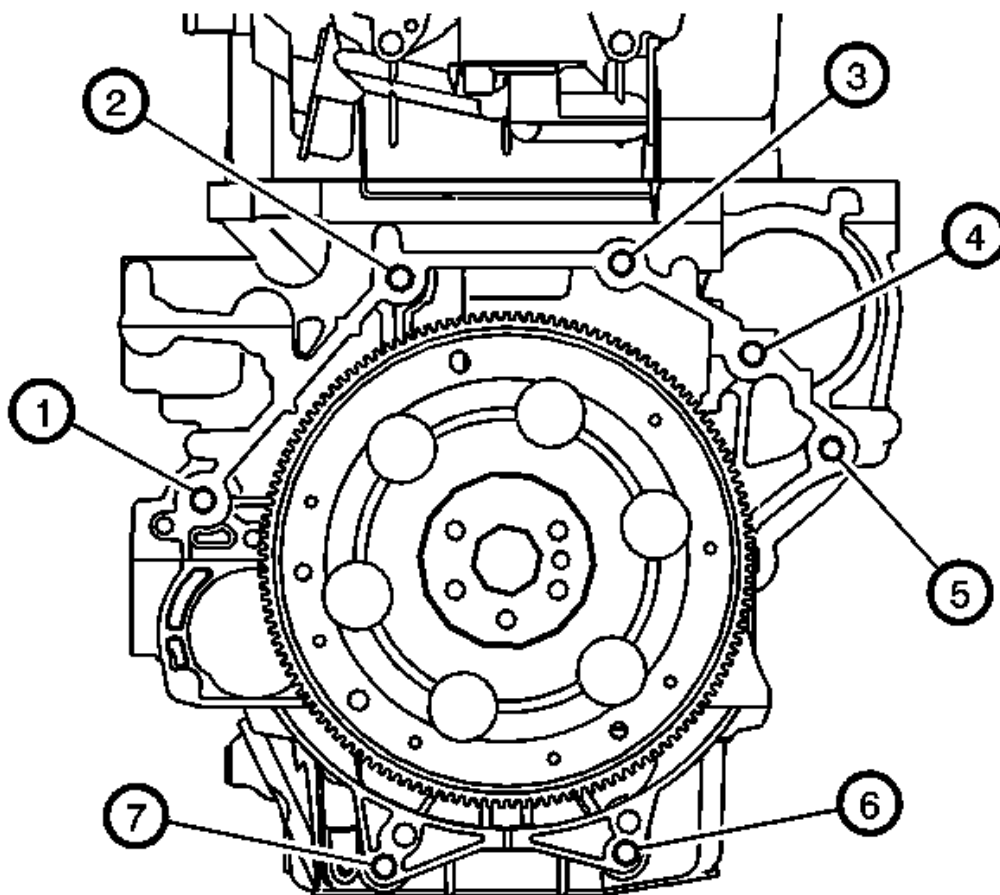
Identifying Engine-To-Transmission Bolt Tightening Sequence
